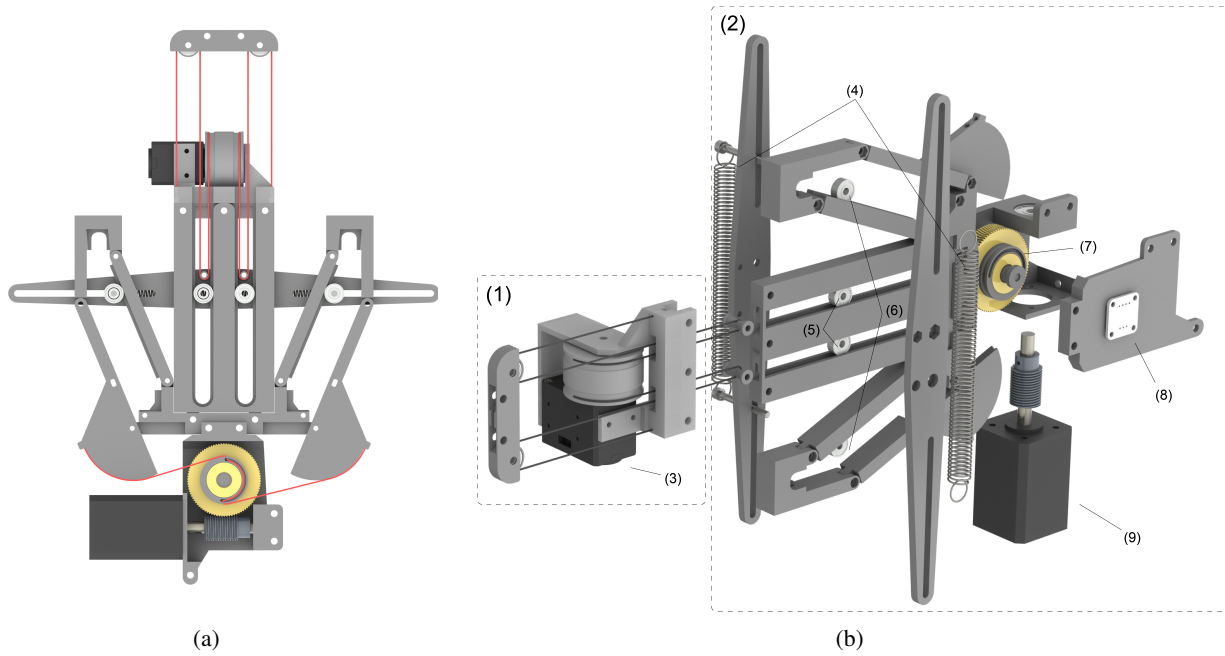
(a) A top-down section view illustrating the cable routing of the mechanism in red and the mechanism of actuation for the arms. (b) An exploded view of the mechanism highlighting the most important components. (1) The retraction mechanism mainly consists of (3) the retraction servo. (2) The variable stiffness mechanism with (4) the two springs, (5) the guiding roller bearings, (6) the roller bearings for the springs, (7) the worm wheel with integrated pulley, (8) the hall effect sensor, and lastly (9) the motor for the stiffness actuation.
